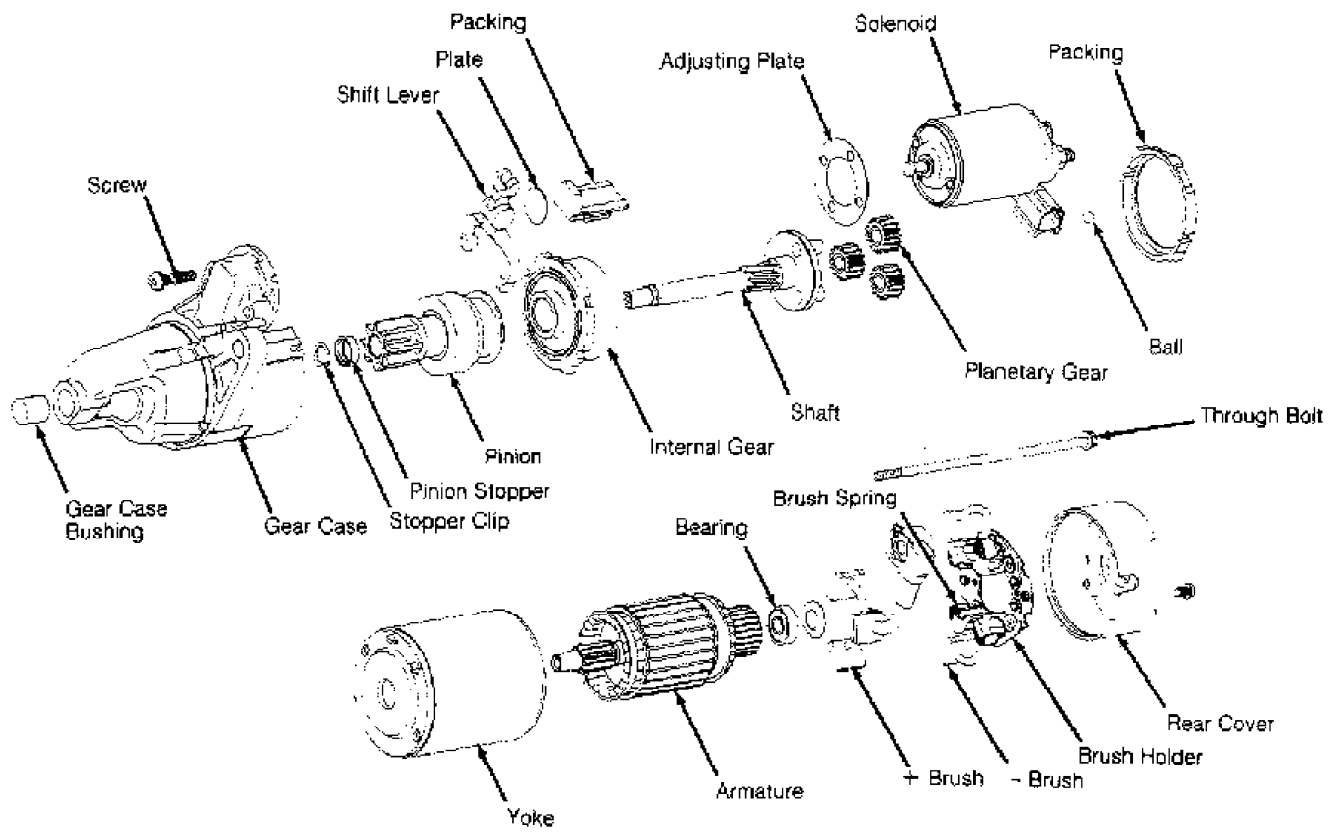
Exploded View Of Mitsubishi Starter (G20 & Q45)
